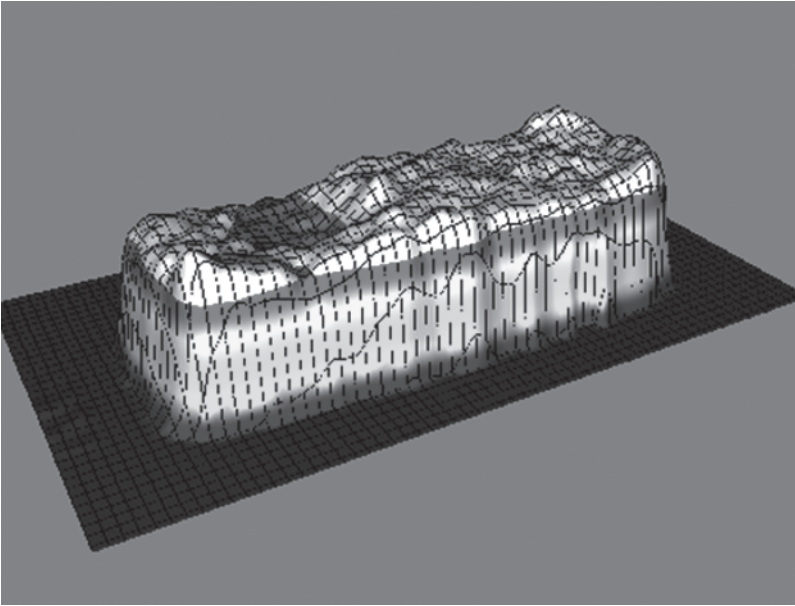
Solder paste inspection image. Source: Courtesy of Koh Young America, Inc.
